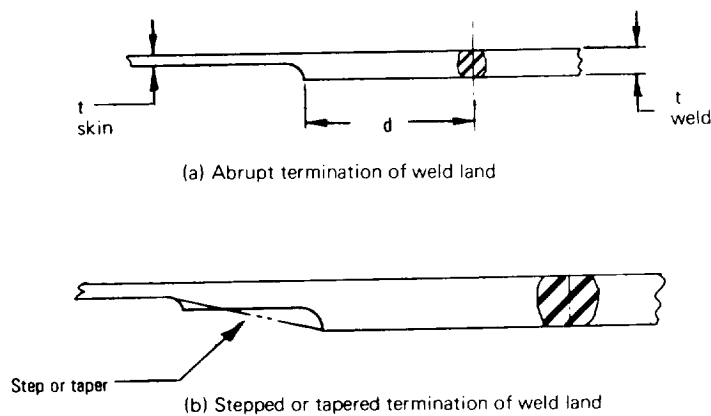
Weld-joint configurations for vehicle tanks.
